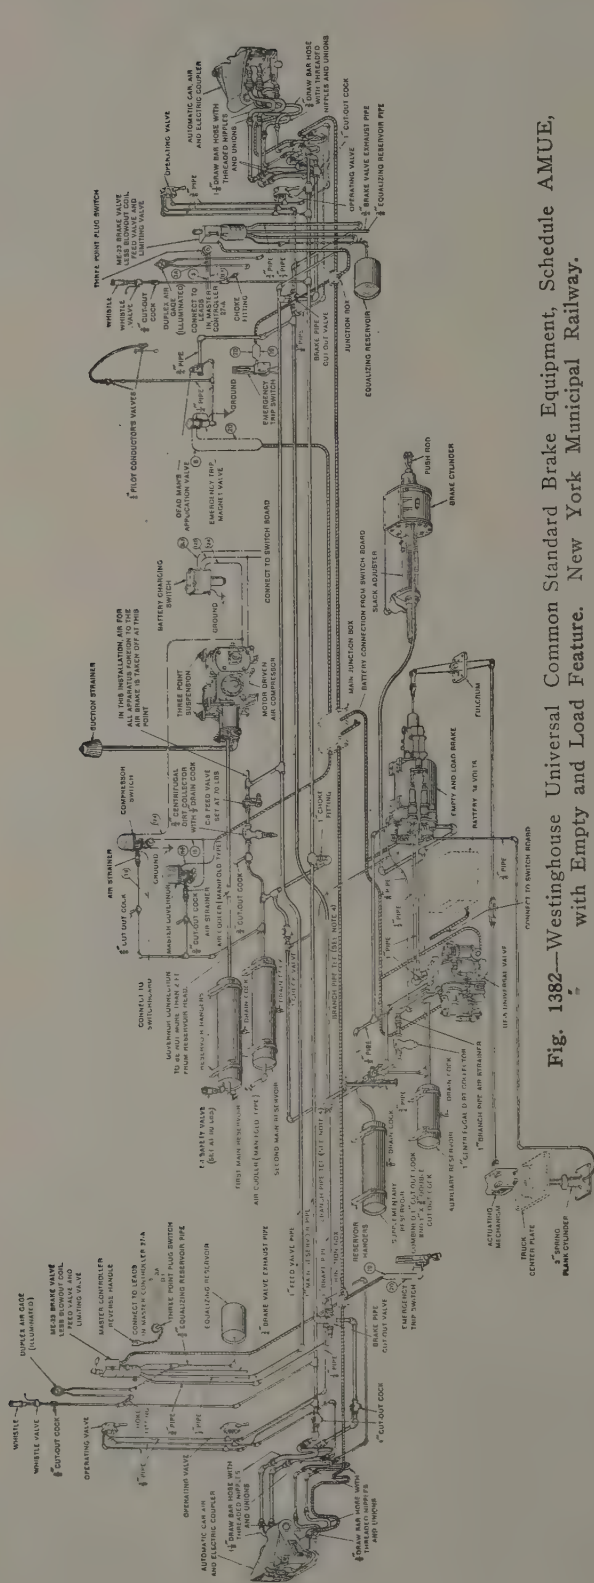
Westinghouse Universal Common Standard Brake Equipment, Schedule AMUE, with Empty and Load Feature. New York Municipal Railway.
